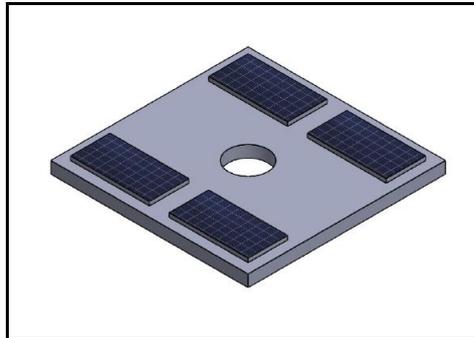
The CAD drawing of Solar Panel Arrangements.
